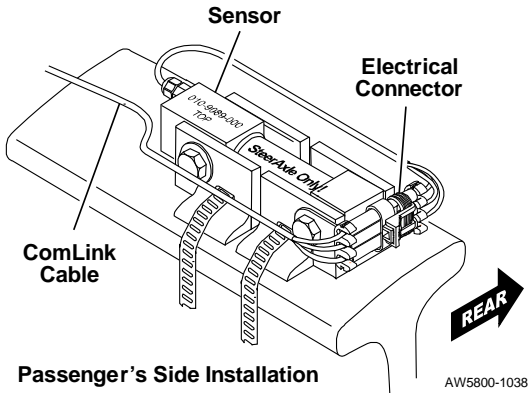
Placing the ComLink Cable for Passenger's Side Hookup
